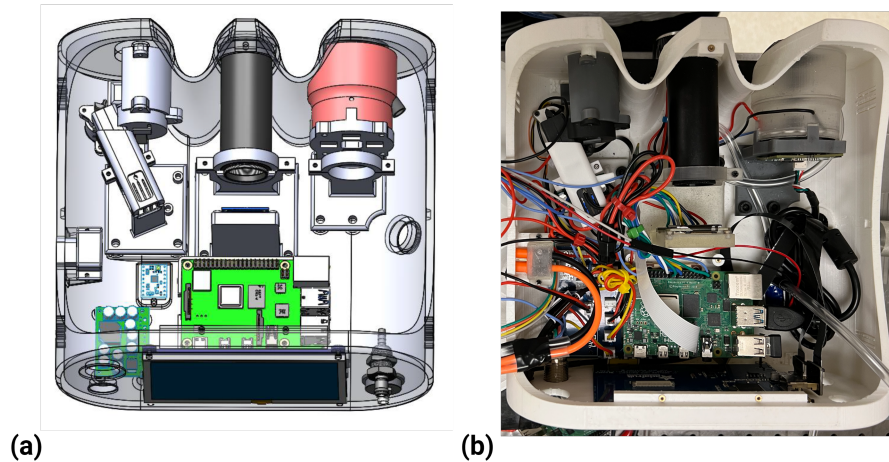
The 3-in-1 device’s (a) CAD model and (b) prototype with 3D-printed parts and electro-mechanical components assembled.
